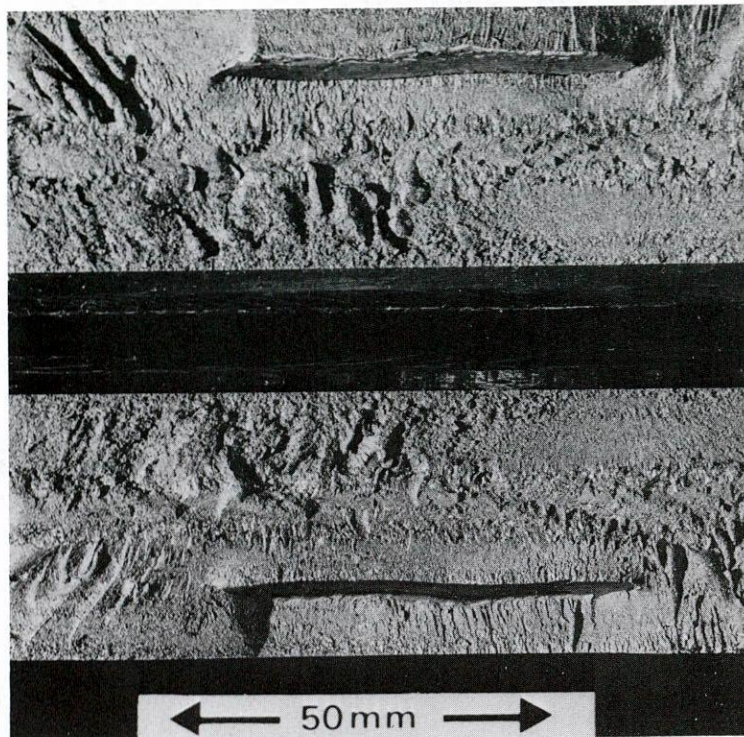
Fracture surfaces revealing lack of fusion, defect 25.
